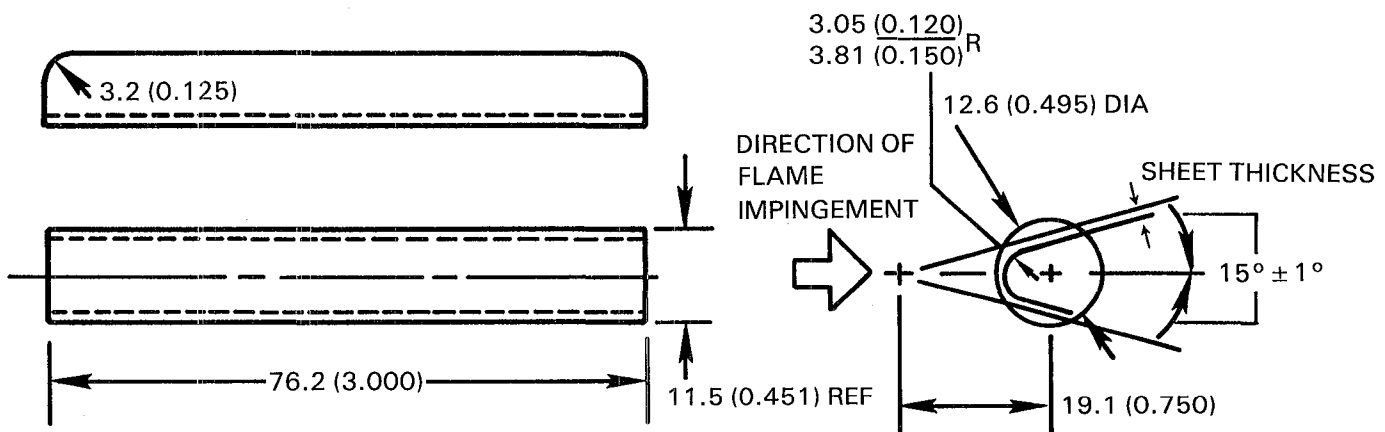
Sheet Metal Oxidation Burner Rig Test Specimen
